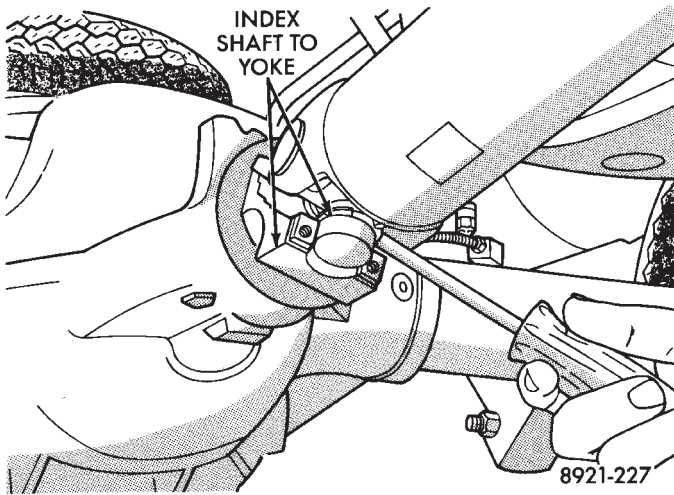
Marking Propeller Shaft And Yoke For Alignment Reference
